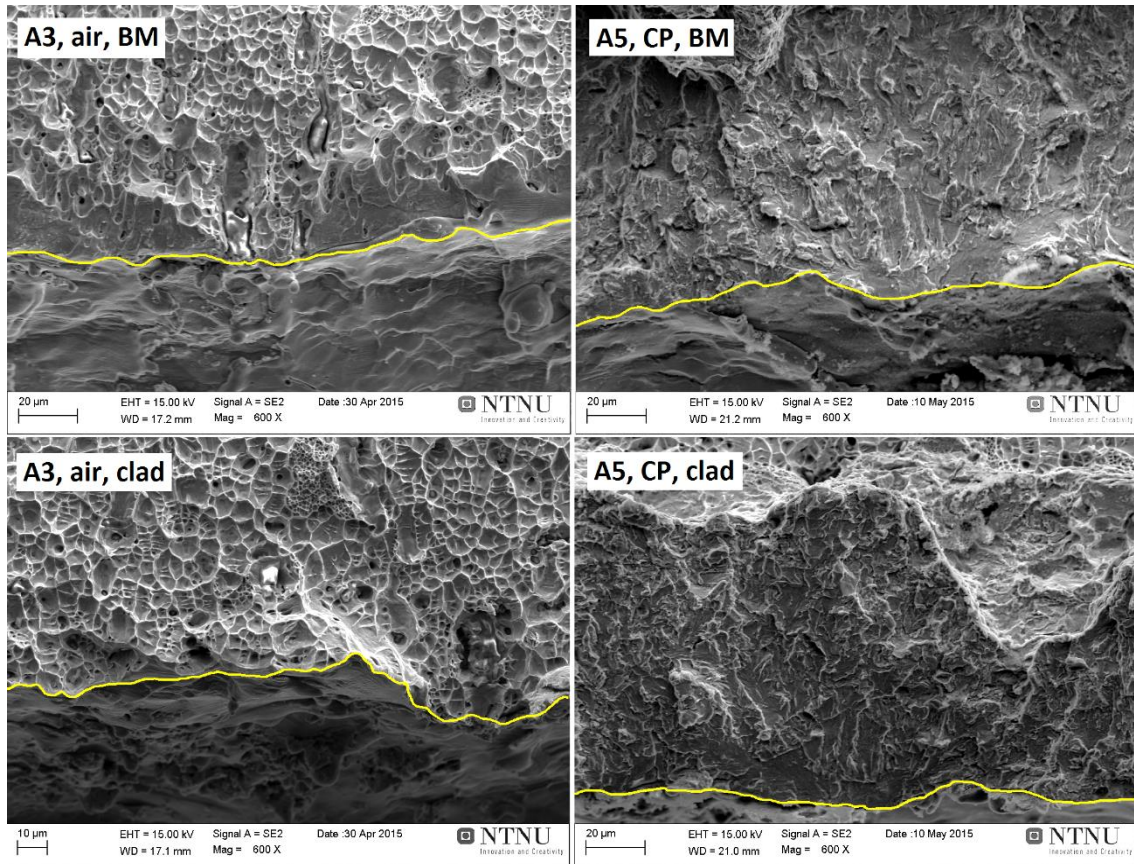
Fracture surfaces for sample A. The term “clad” and “BM” denotes which section of the specimen the image is taken at. The image is taken at the center region. The fracture surface is above the yellow line.
